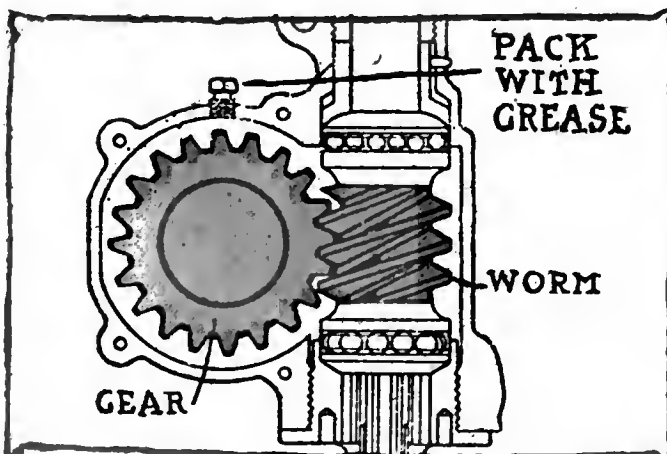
Indicating point in worm and gear steering where grease should be applied.
